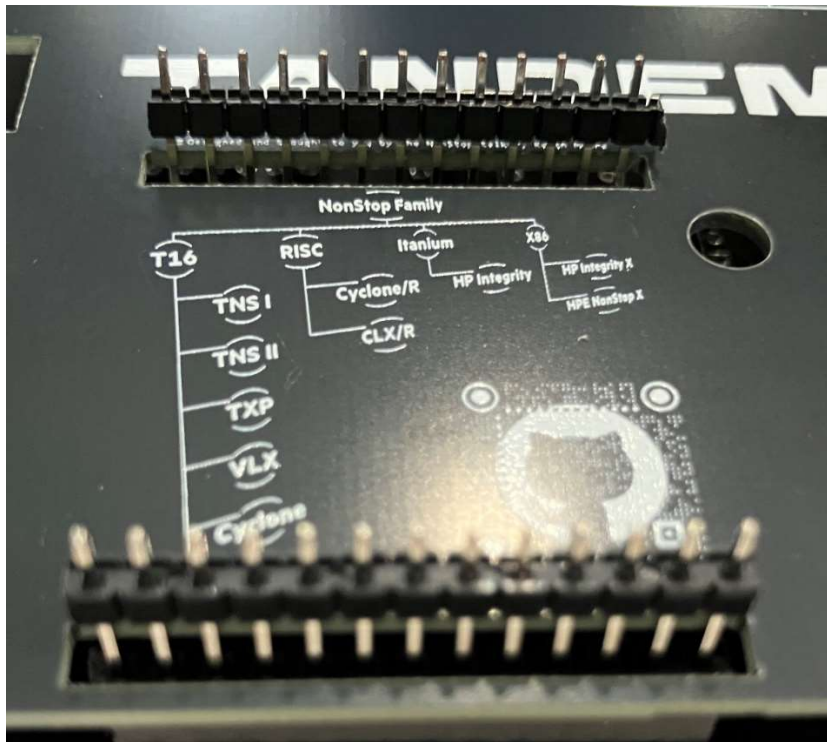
HEADERS PLACED PRIOR TO SOLDERING -NO SOLDER ON BOTTOM SIDE YET
